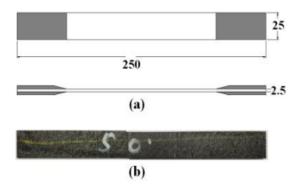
(a) Shape of NCF composites specimen (b) Molded NCF composites specimen
